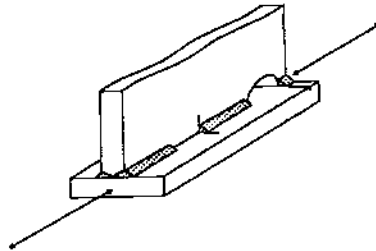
UKDEn Detail in Welded Girders 5
